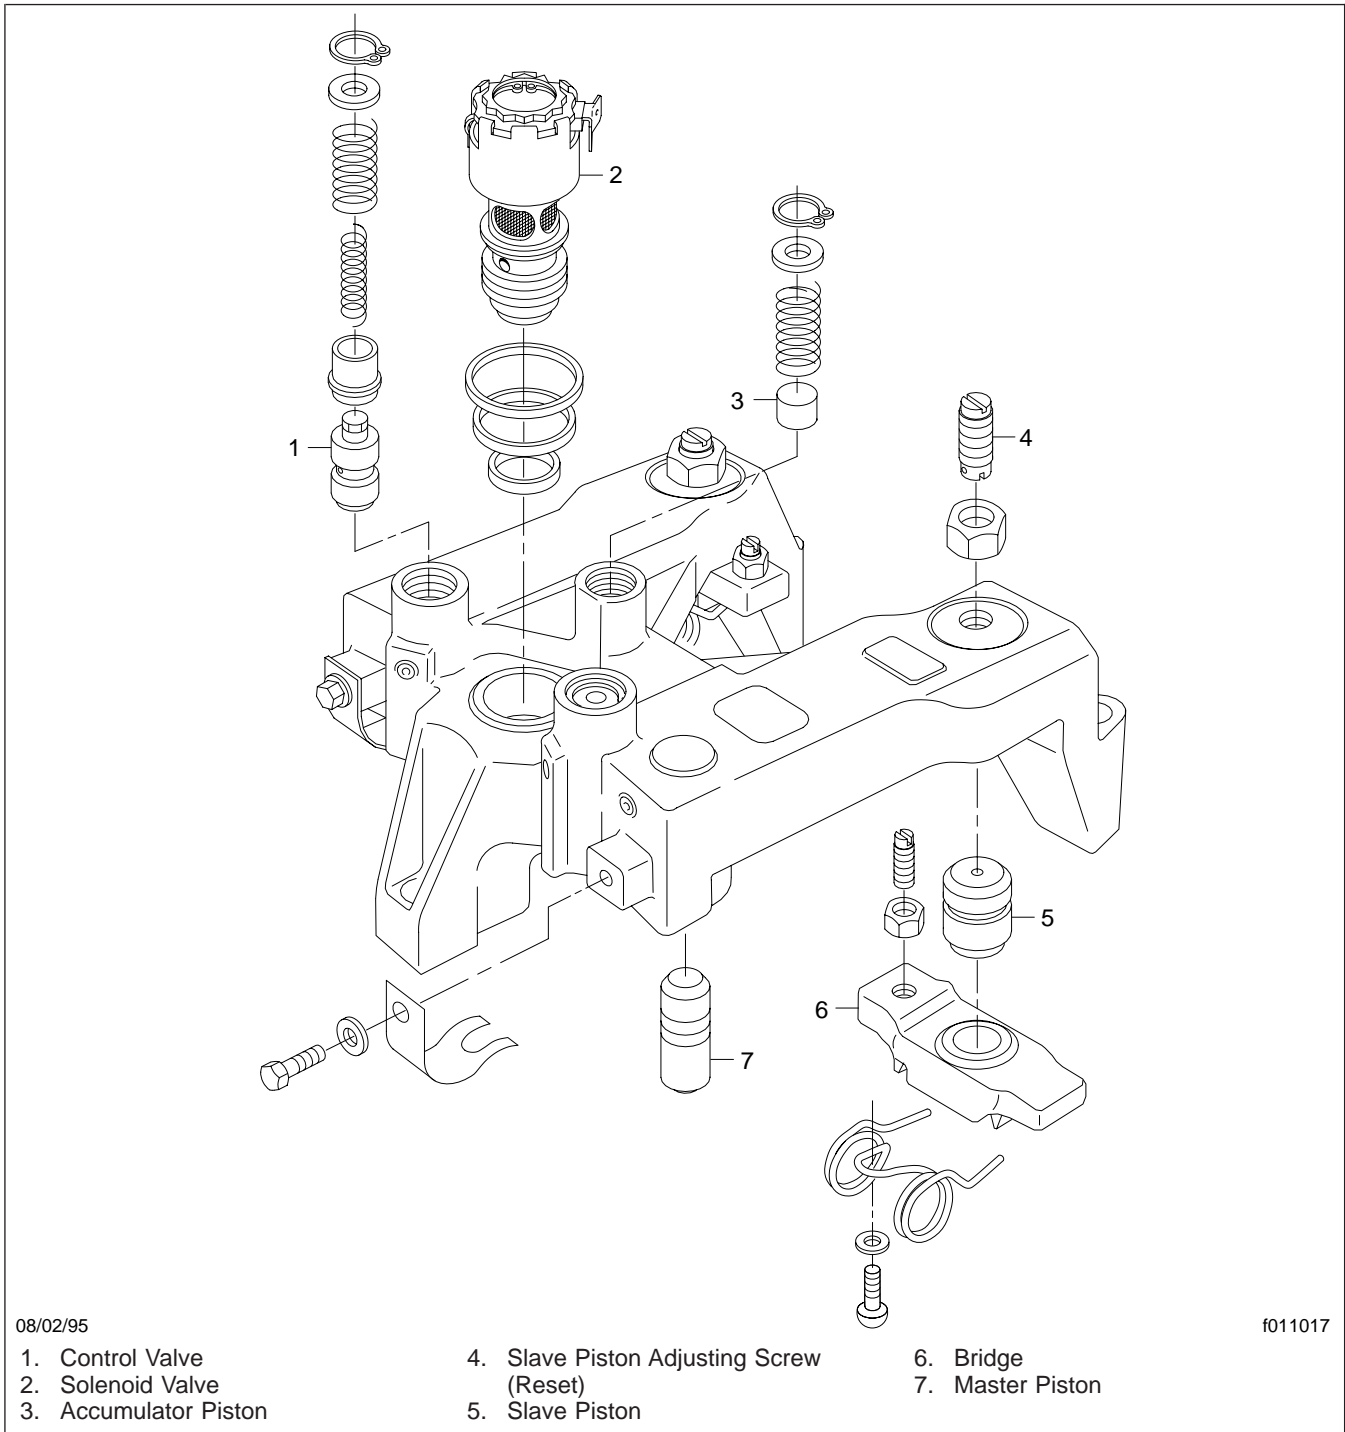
, Model 760A or 765 Housing Assembly (exploded view)
